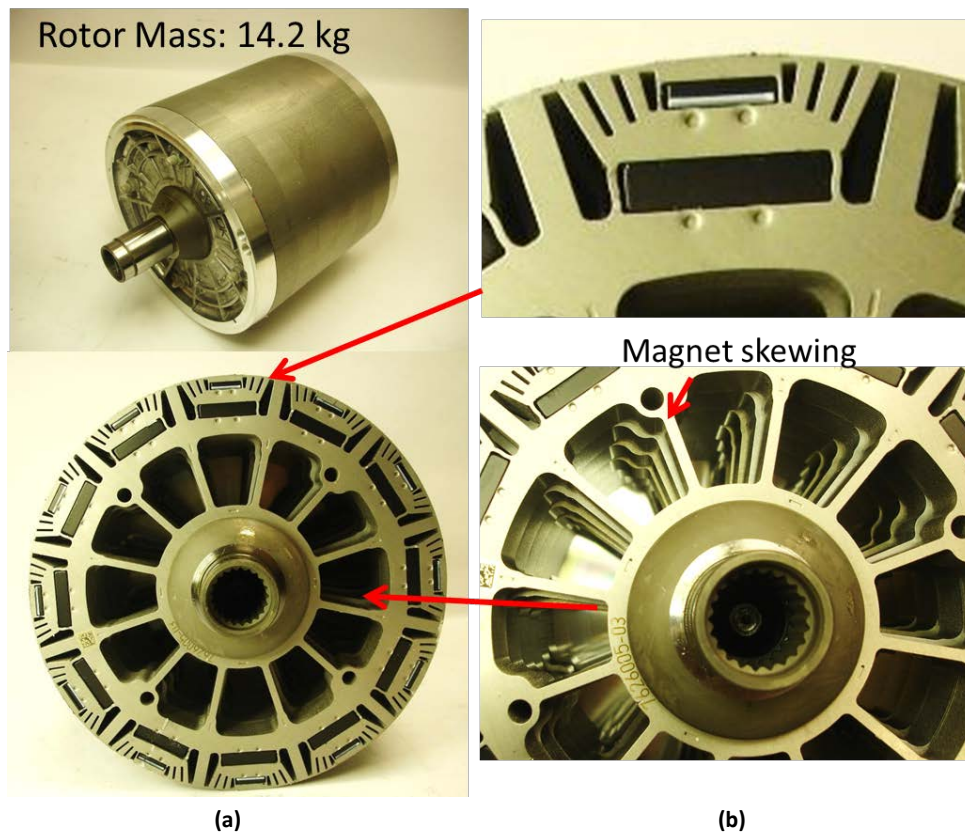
2016 BMW i3 motor rotor (a) and rotor magnets (b).
